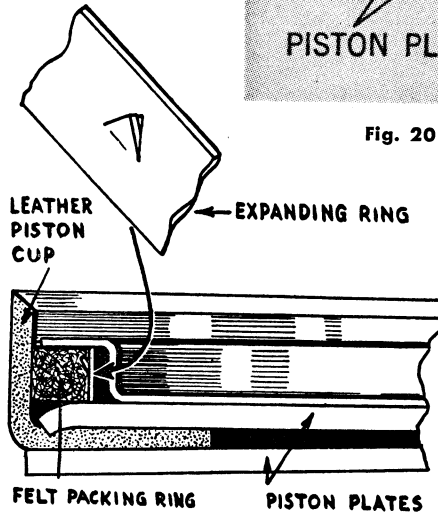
Expander ring installed firmly against felt packing ring with grippers pointing upward and outward and expander ring hooked securely in notch provided near loop
